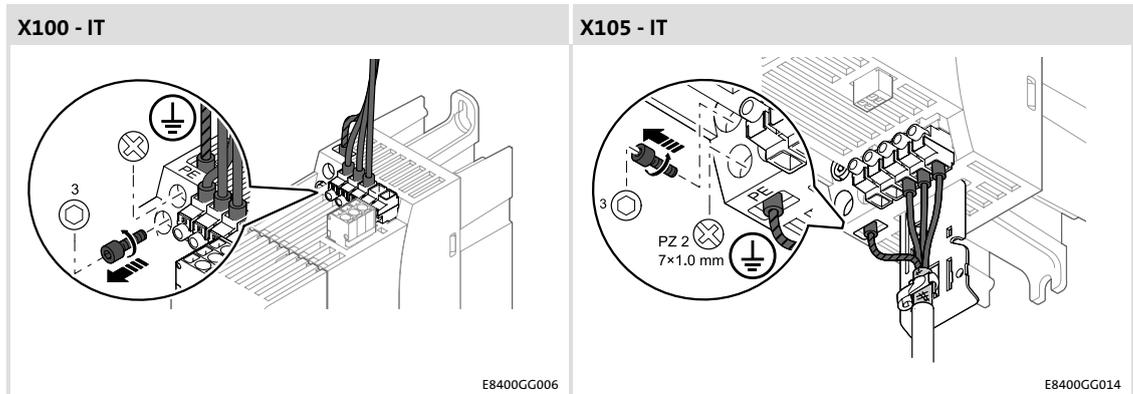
Removal of the contact screws for device sizes 1 ... 3 (on the supply side and on the motor side)
